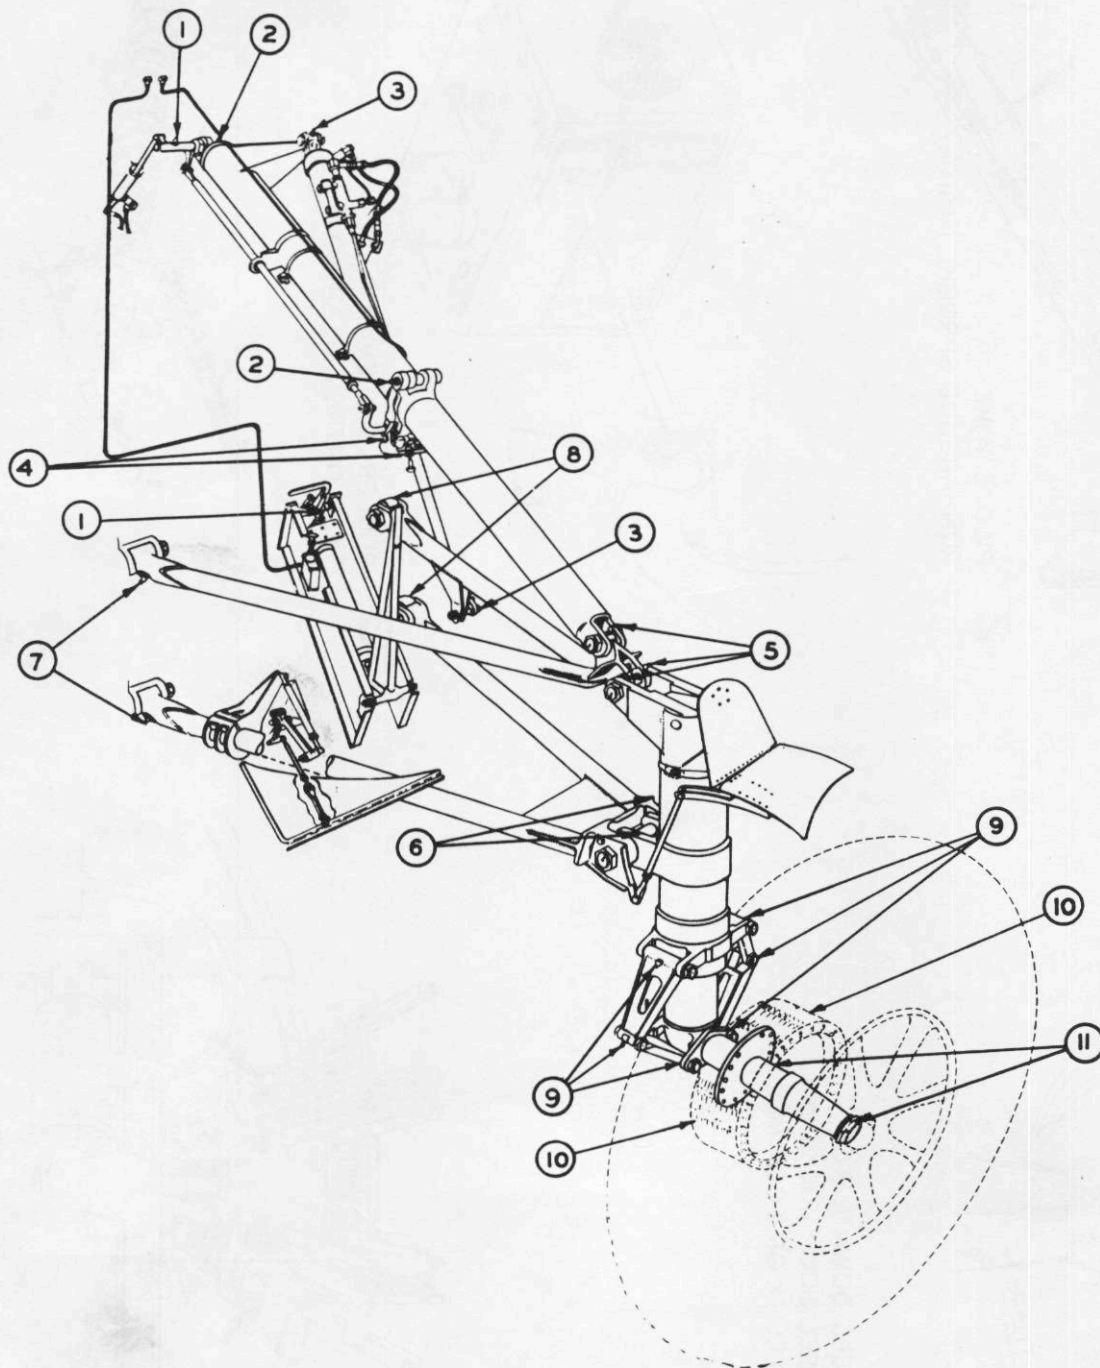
(Sheet 4 of 5 sheets)—Main Landing Gear Lubrication Chart (PBX-5A ONLY)
